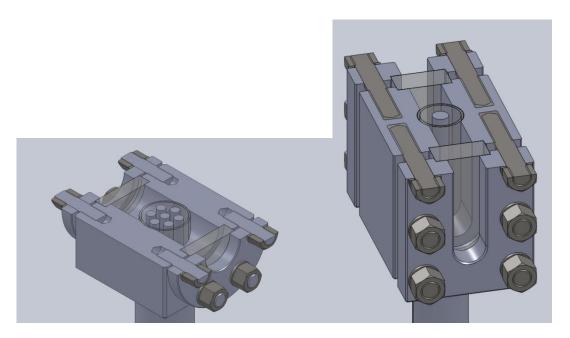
Cross Sections of viewing windows: Rod bundle test section (left), single rod test section (right)
